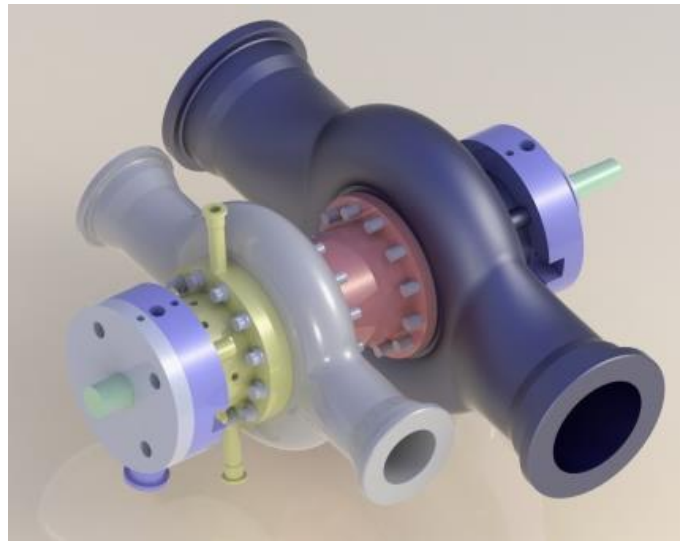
Example of an Axial sCO₂ Expander [Kalra 2014]
